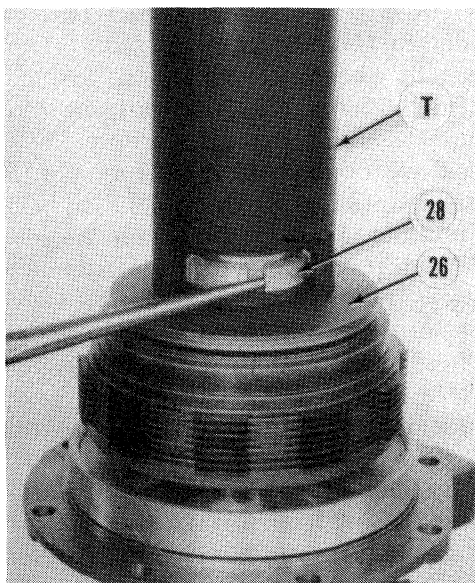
Use horseshoe shaped tool (T) and a press to compress Belleville springs.
